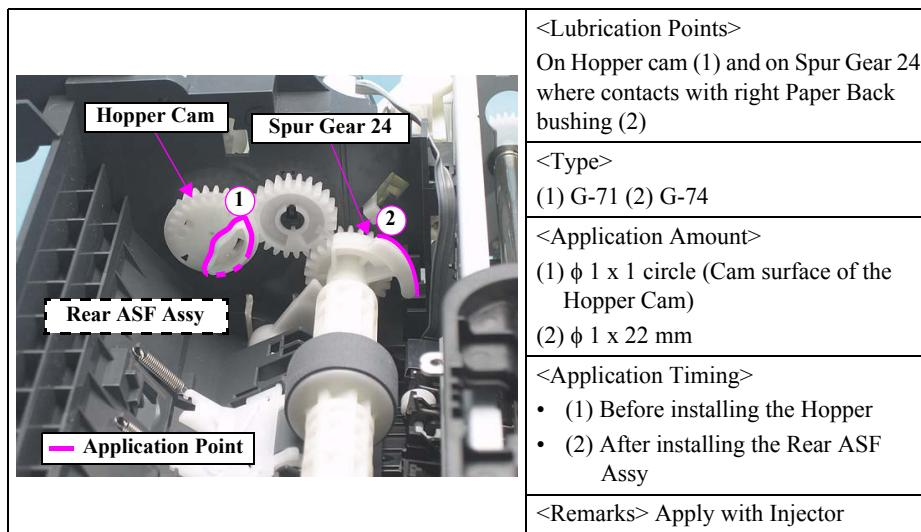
Lubrication of the Rear Paper Guide (6)
